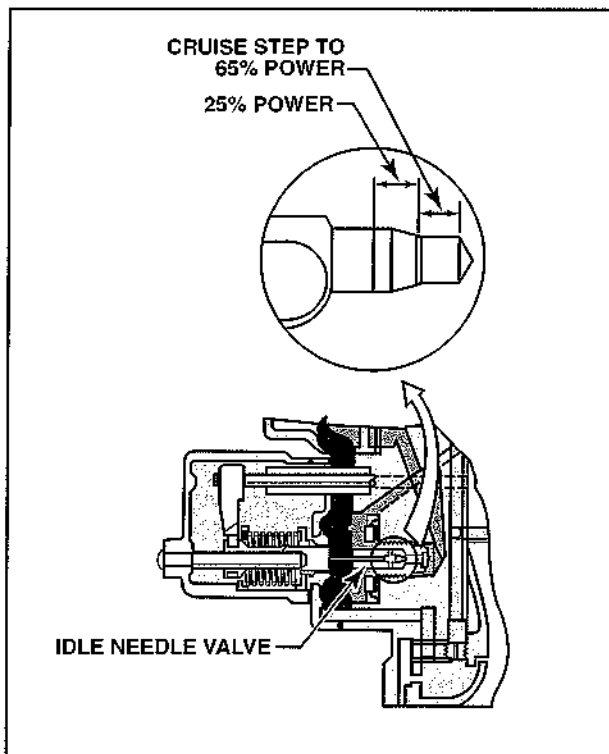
In carburetors that use a double-step idle valve for power enrichment, the needle valve is cut in steps to regulate the amount of fuel that flows to the discharge nozzle for idle and cruise power settings.
